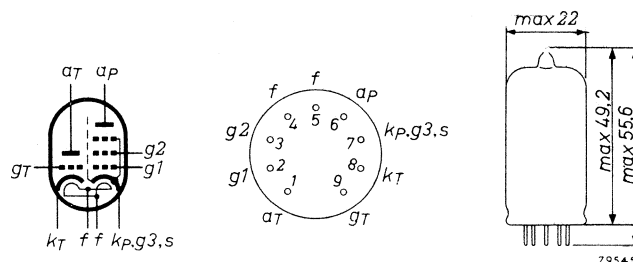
Base connections and dimensional drawing (dimensions in mm) of the PCF 80.
